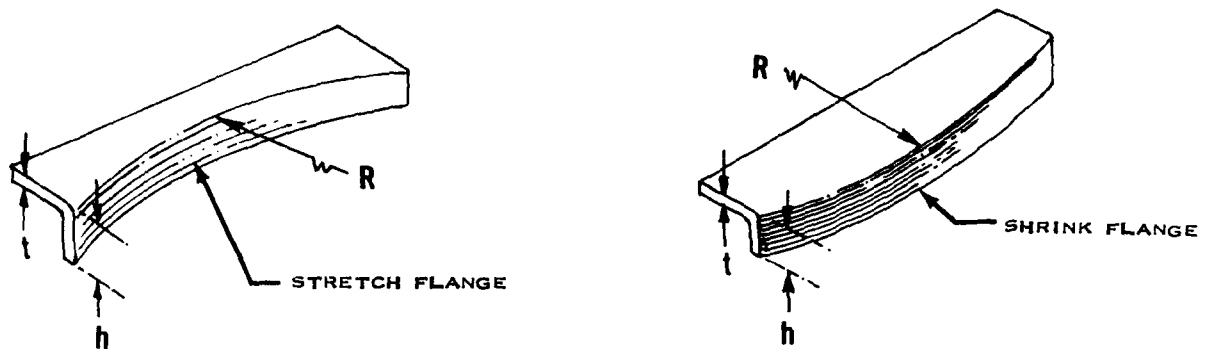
PARAMETERS FOR RUBBER FLANGING
